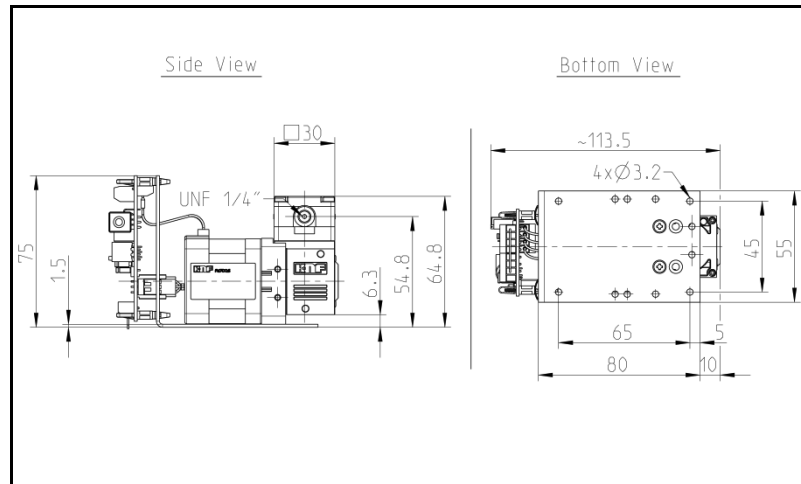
Mounting dimensions FEM 1.02\_.55 RC
